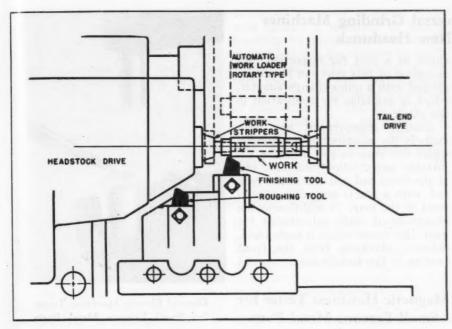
Tool Layout for Machining Valve Guides on Imp Automatic Lathe Shown in Fig. 1
